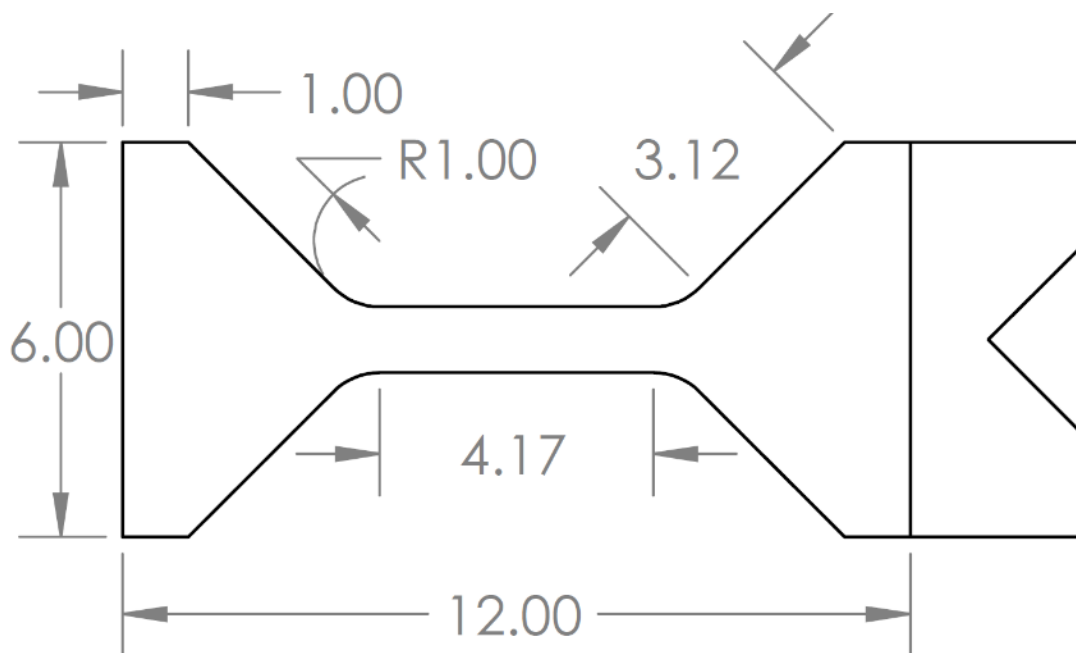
Drawing of Dogbone samples used. Dimensions in mm. Samples are 1mm thick.
